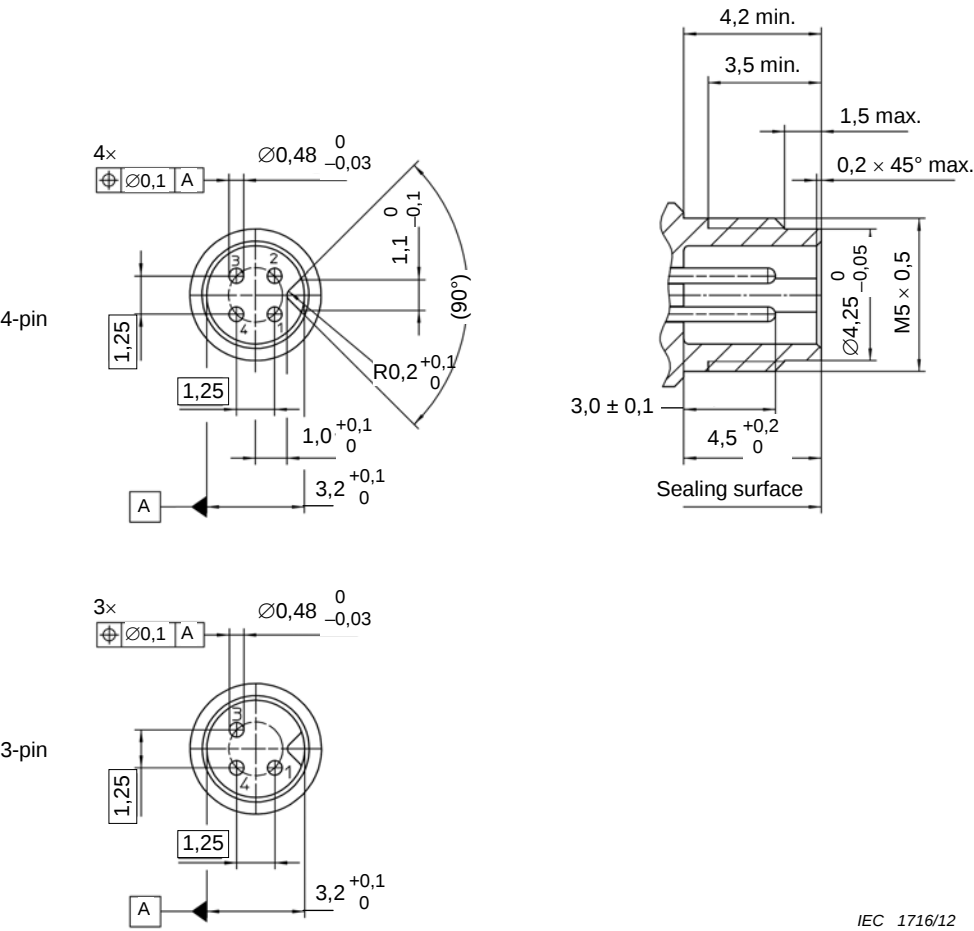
M5 thread 4-pin/3-pin integral connector for d.c. proximity switches
